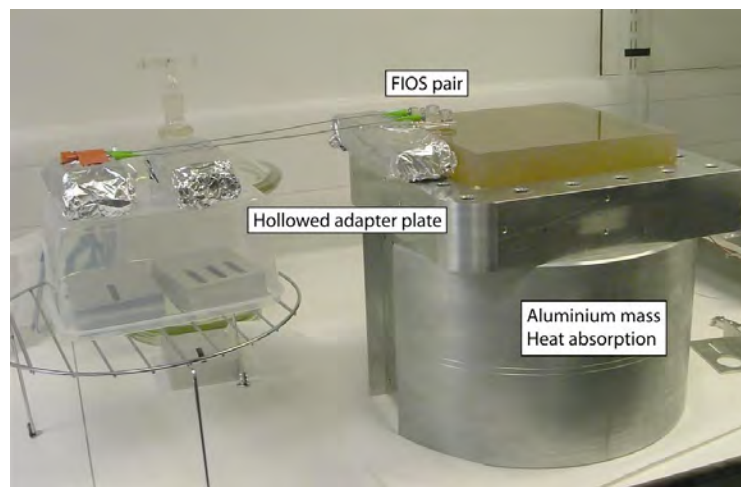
Wax bonding of the FIOS QM Zerodur baseplate to the hollowed adapter.
